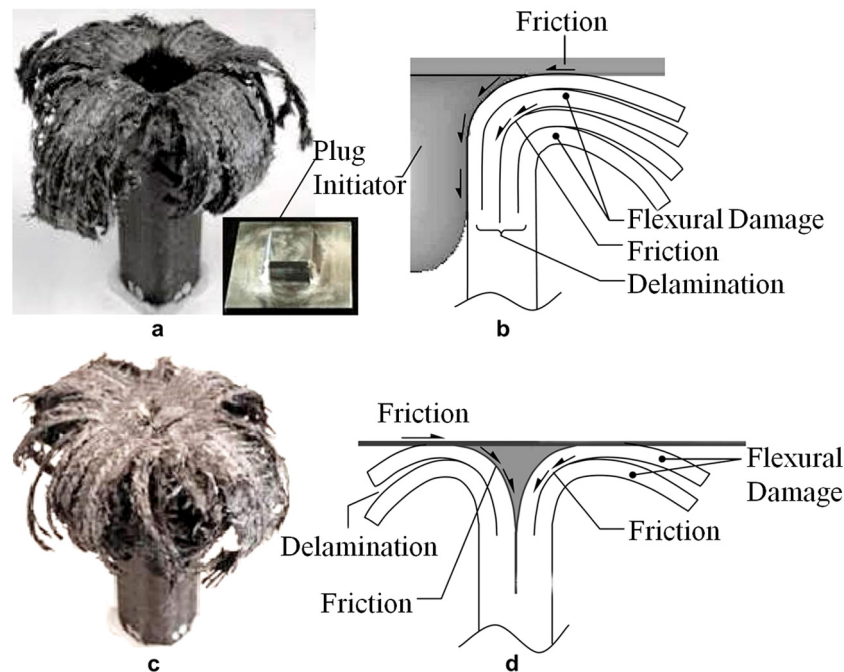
Schematic of damage/failure mechanisms of braided composite tubes in the crash front with and without plug initiator [8].
